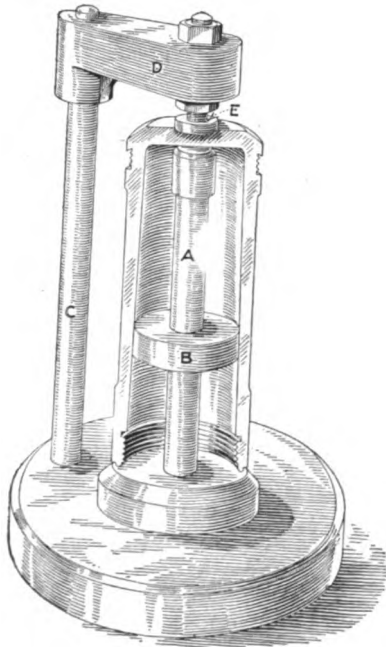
BENCH INSPECTION GAGE FOR THICKNESS OF BOTTOM
